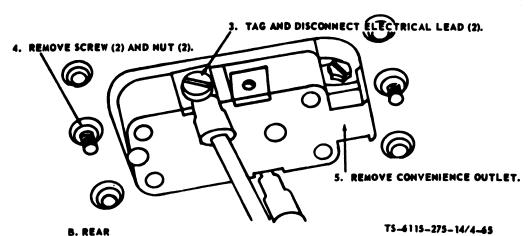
Convenience outlet receptocle connector and lower door, removal and installation (Model MEP-018A).
